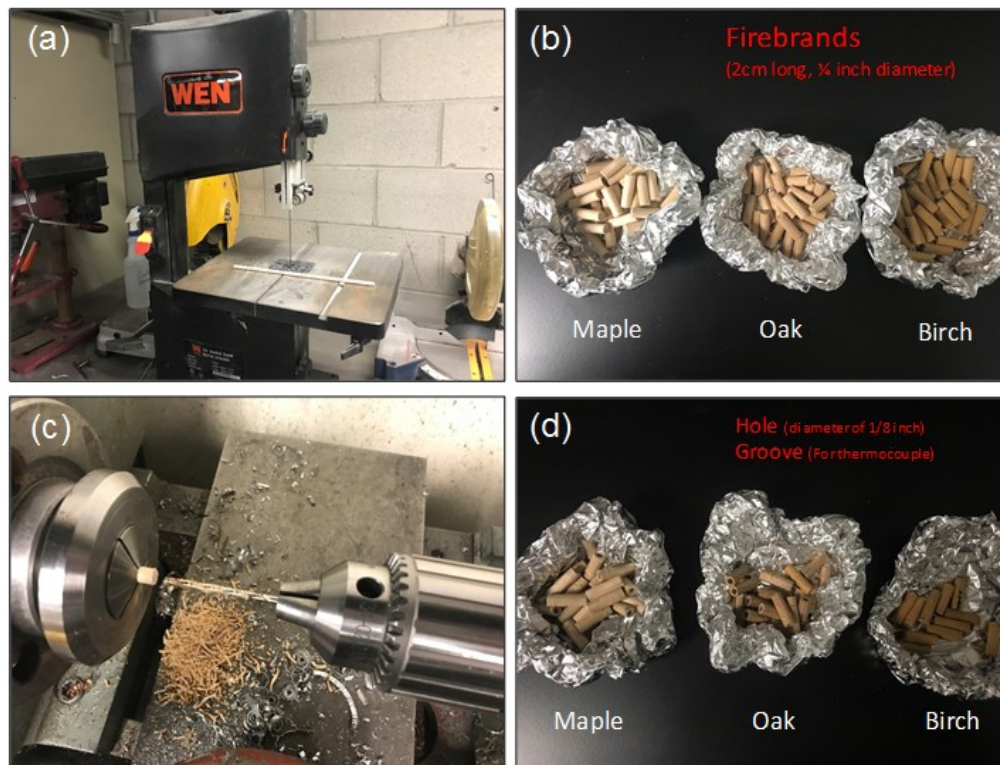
Sample preparation of maple, oak, and birch rods. Shown here are: (a). cutting rods into small pieces; (b). preparing rods after cutting; (c). drilling holes along horizontal axis via lathe machining; and (d). preparing rods after drilling.
